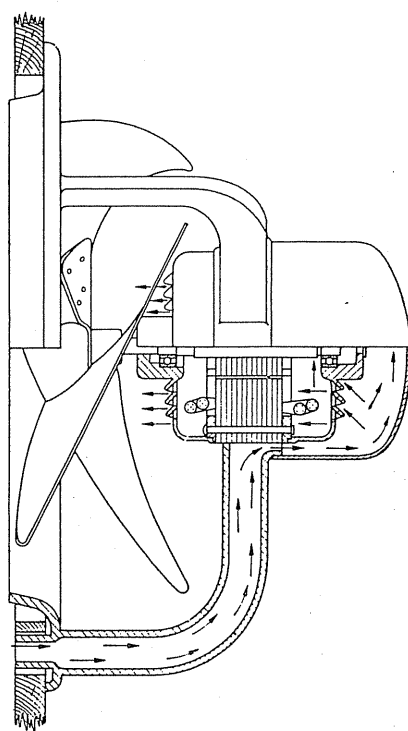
Cooling of motor from the pressure side of an axial-flow fan.
